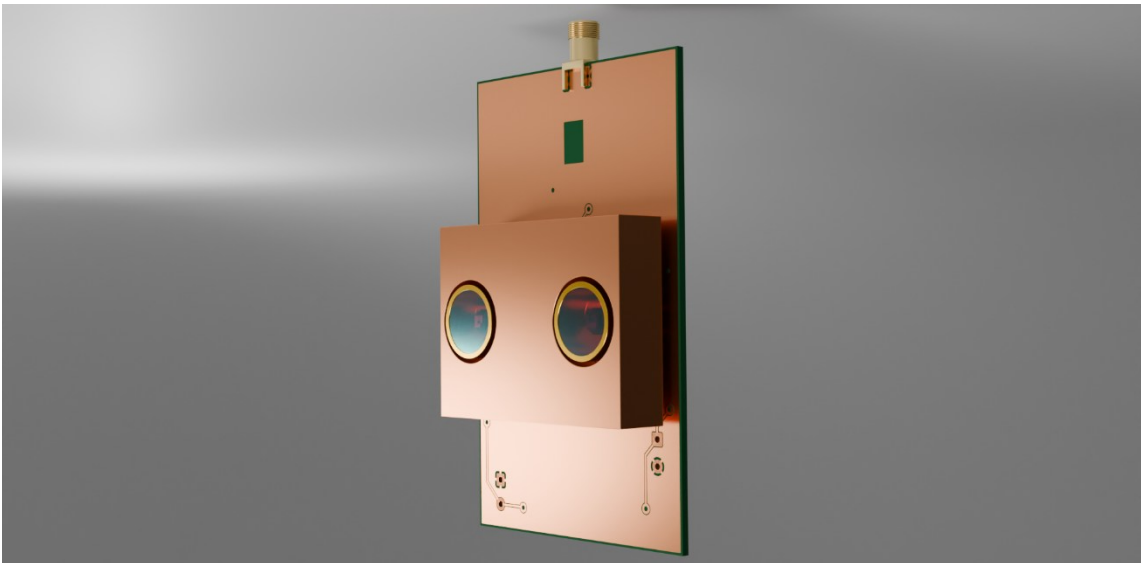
3D photorealistic render of heatsink and photodiode assembly integrated with PCB.
